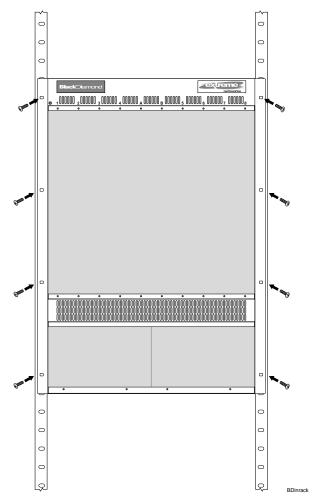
BlackDiamond 6800 chassis mounted in rack
